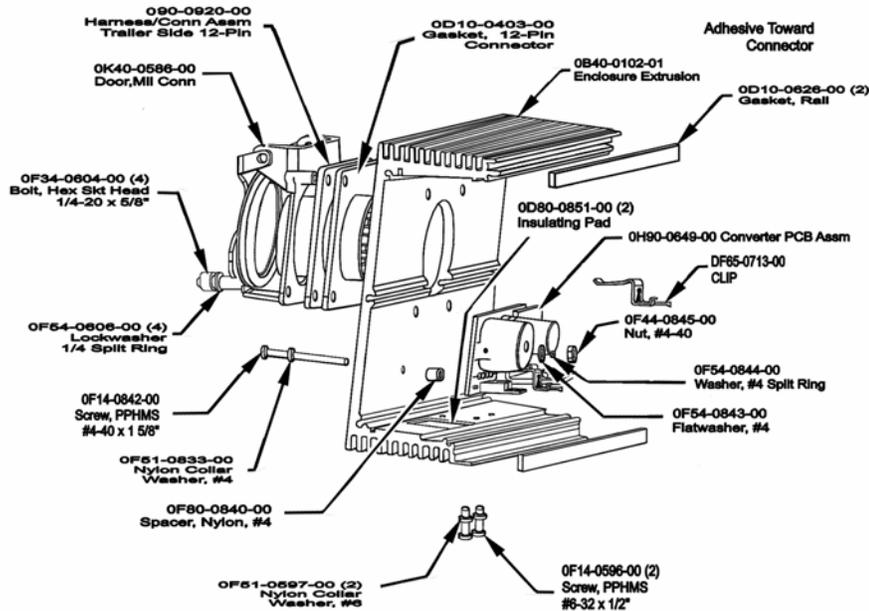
0N10-1038-00 Rear Module Sub-Assembly w/Trailer Connector and Converter Module
